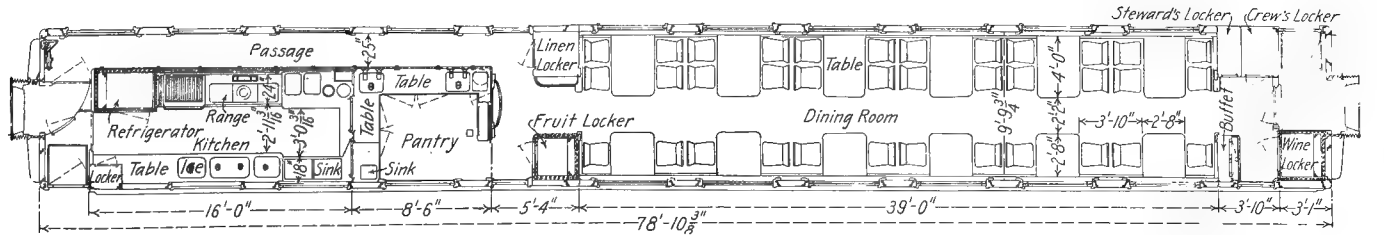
Floor Plan of Pennsylvania Railroad Dining Car.
